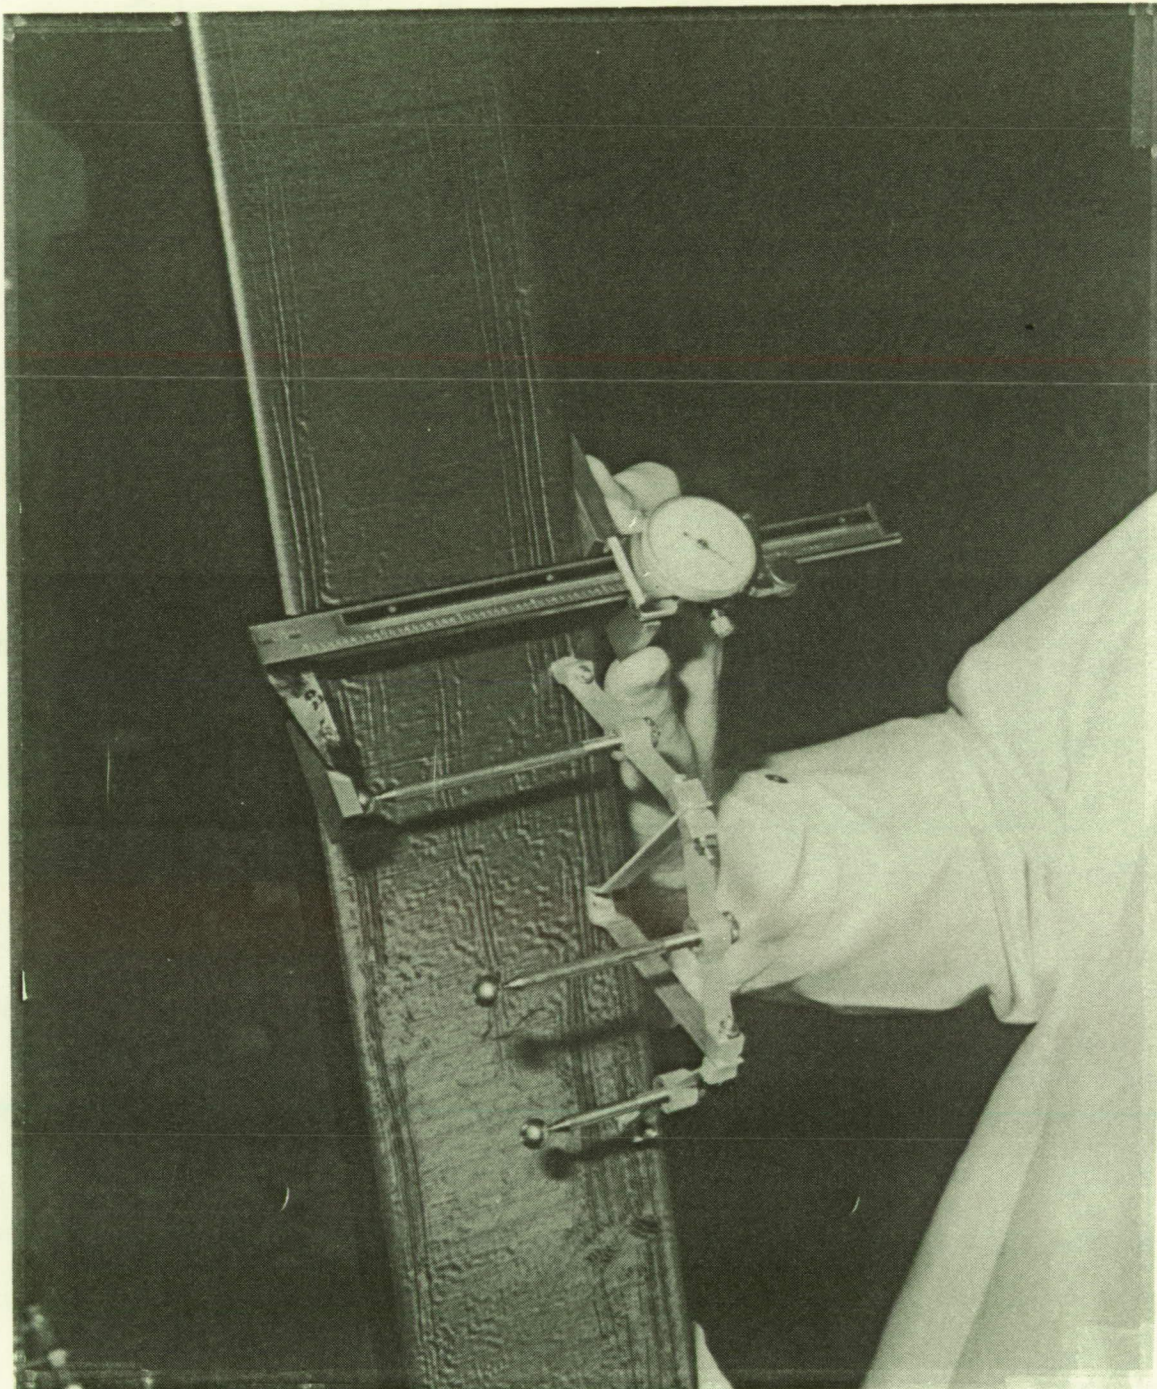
Modified Dial Calipers Are Used To Set The Standoffs To Their Proper Height With Respect To The Bottom Of The Box Beam. They Are Set Per The Panel Assembly Drawing 500010.
